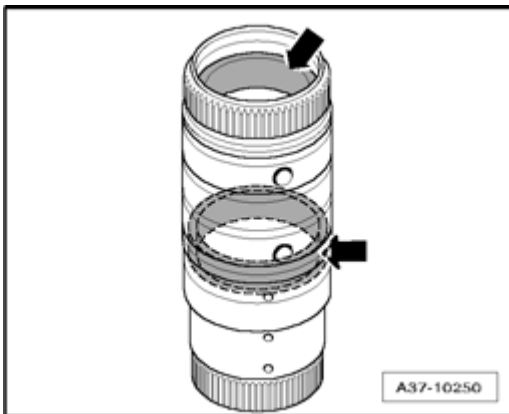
Checking Brass Sleeves Of Sun Shaft For Wear
